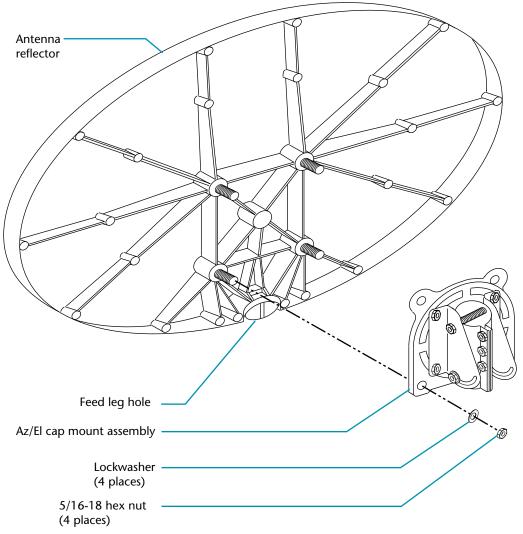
Assembling antenna reflector onto AZ/EL cap mount
